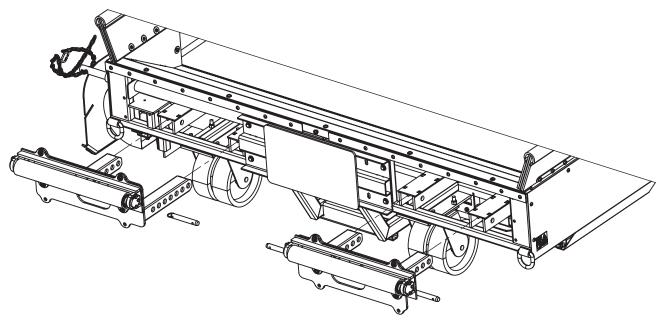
Left-hand and right-hand adjustable-height push rollers reversed to orient the roller above the receiver tubes
